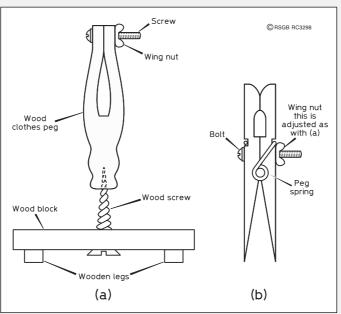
Clothes pegs can be simply converted into general-purpose clamps to provide a 'third hand'. (a) Self-standing mounted on a wooden base. (b) Typical spring peg drilled to accommodate a bolt and terminal-type nut.
